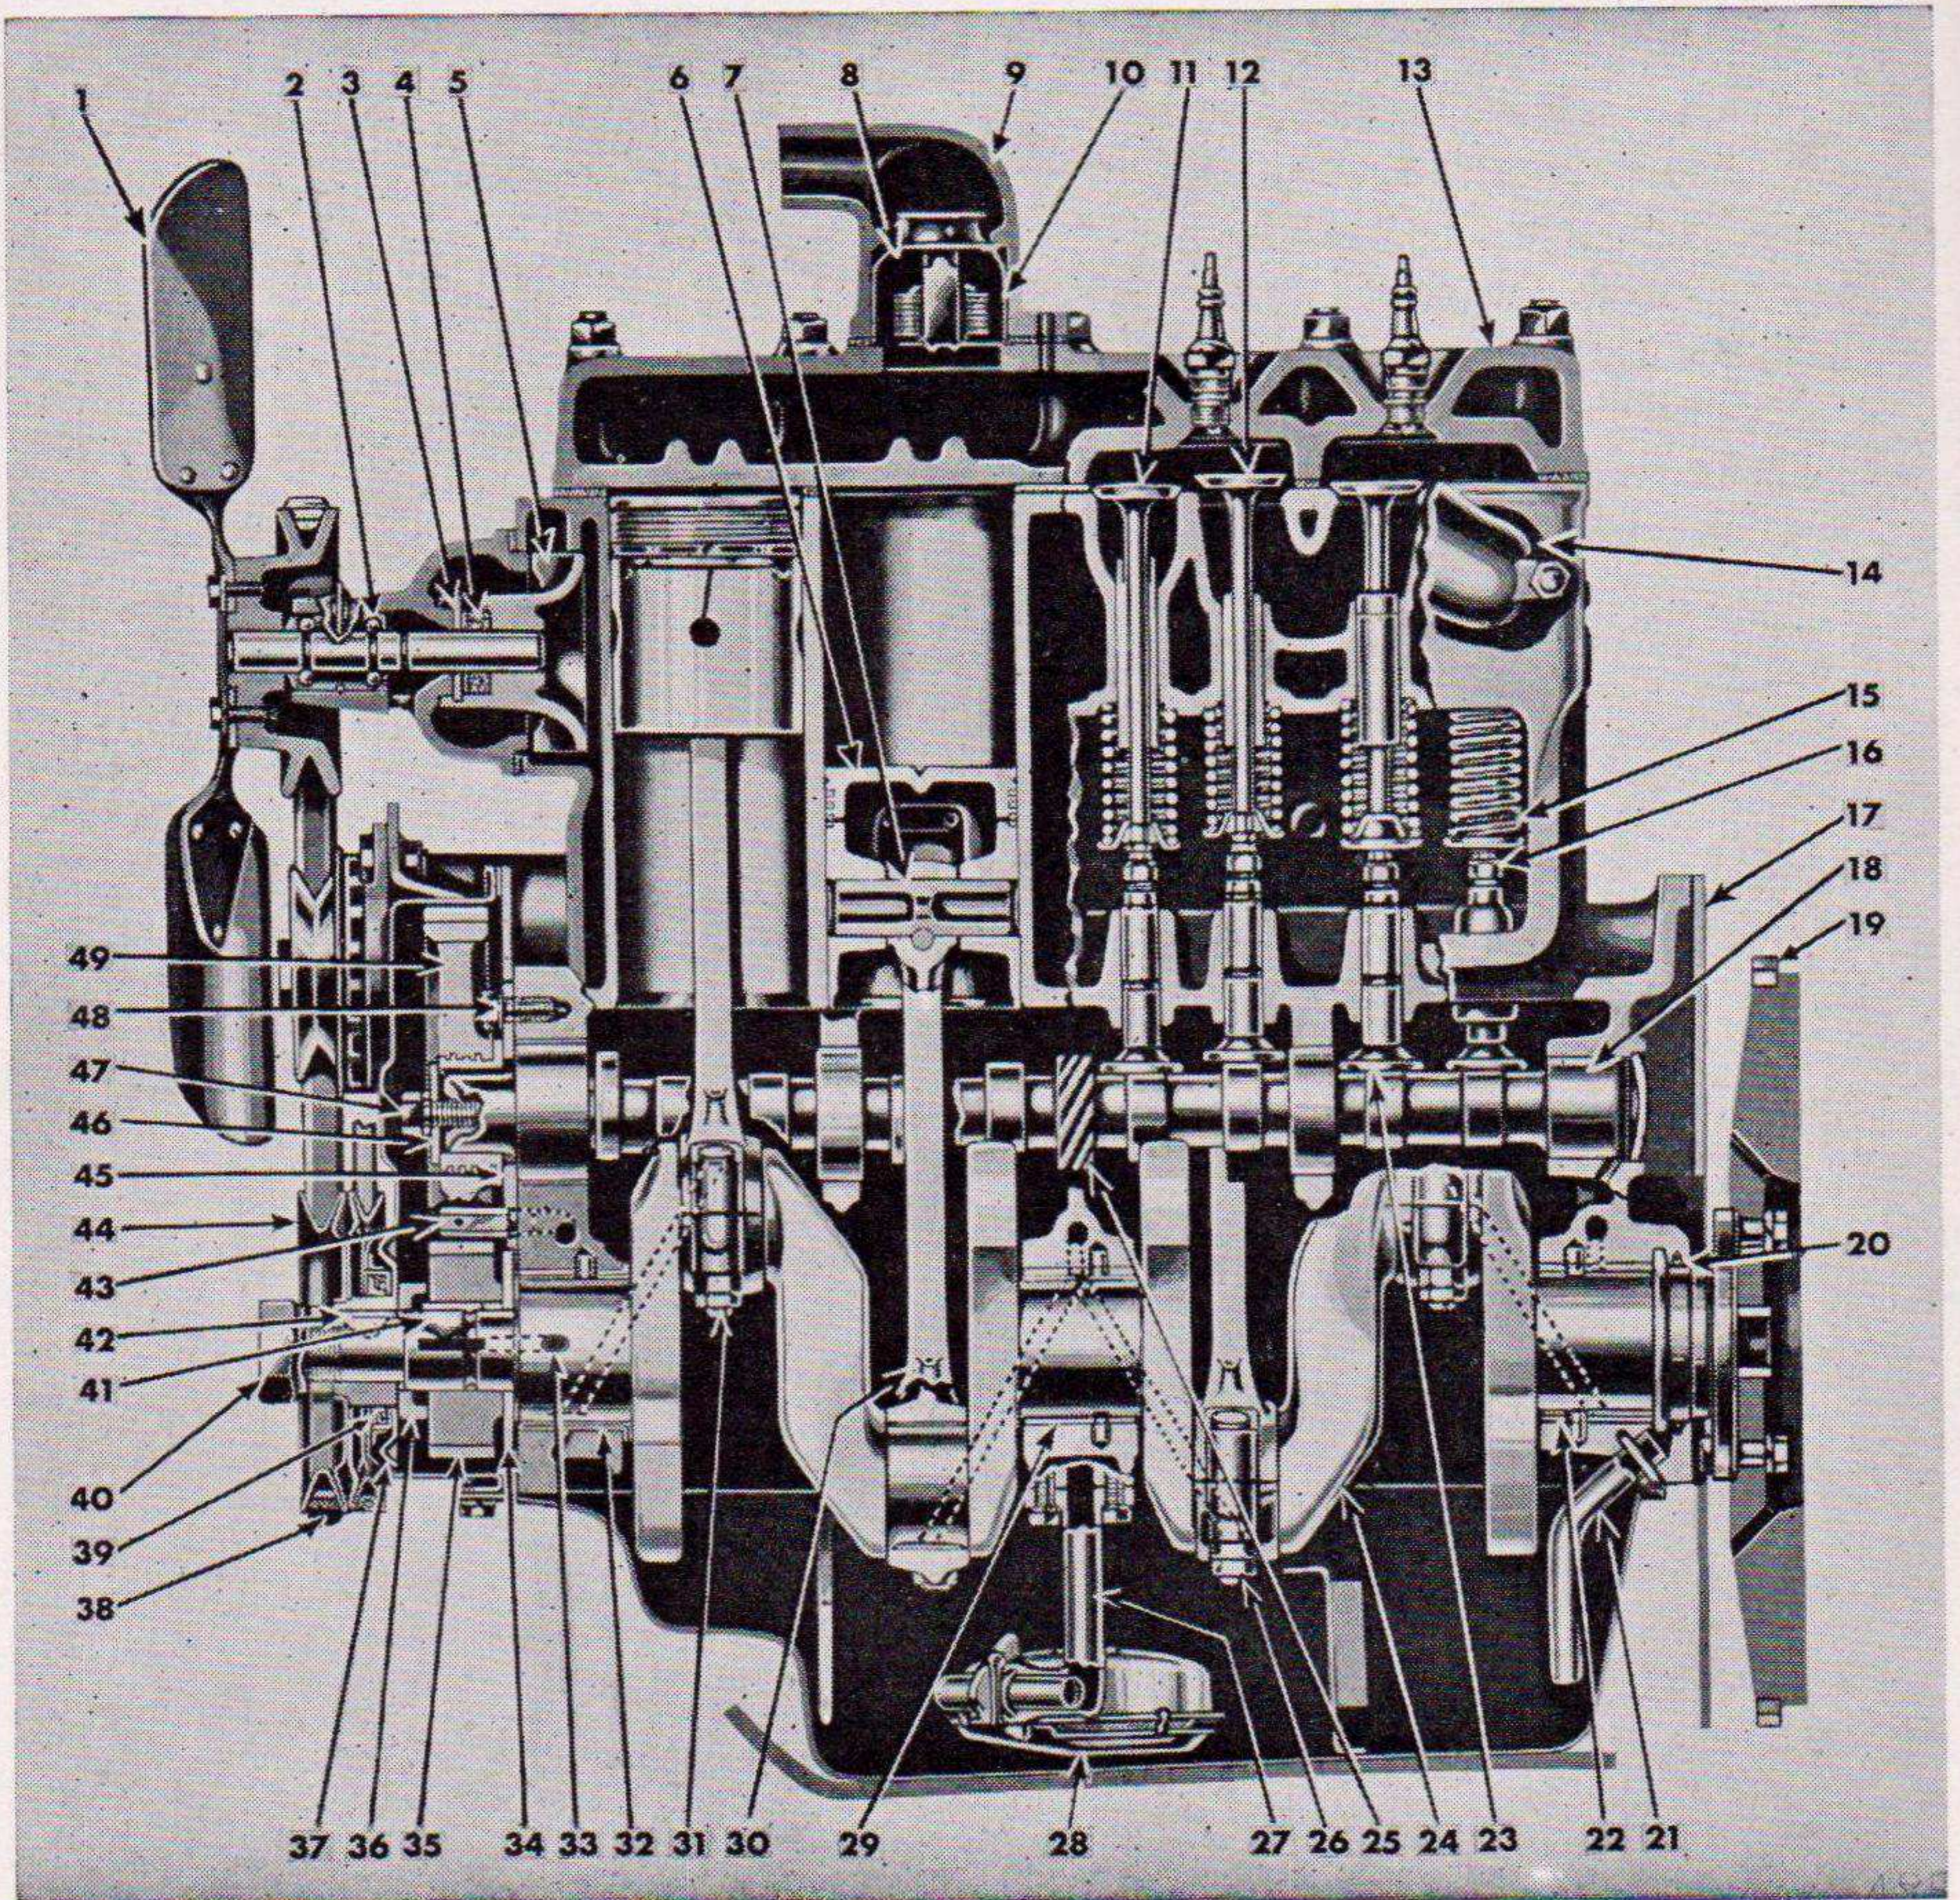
SIDE SECTIONAL VIEW OF ENGINE
